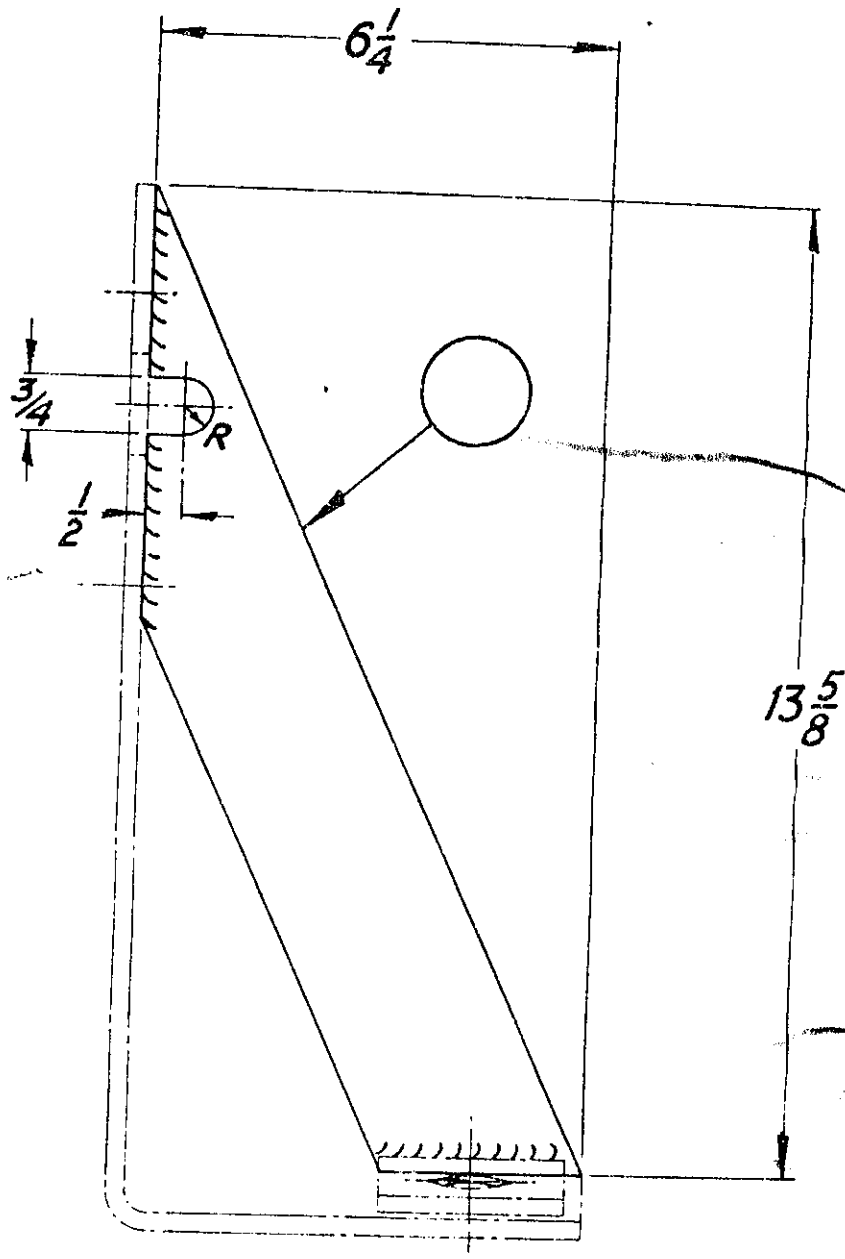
BRACKET ASSEMBLY, SPARE WHEEL CARRIER
